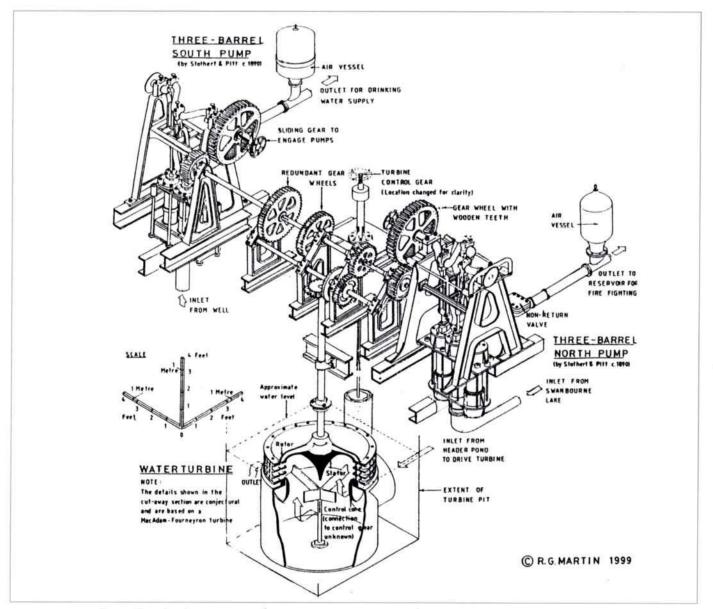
Details of pumping machinery installed 1902 by Stothert & Pitt Ltd.
